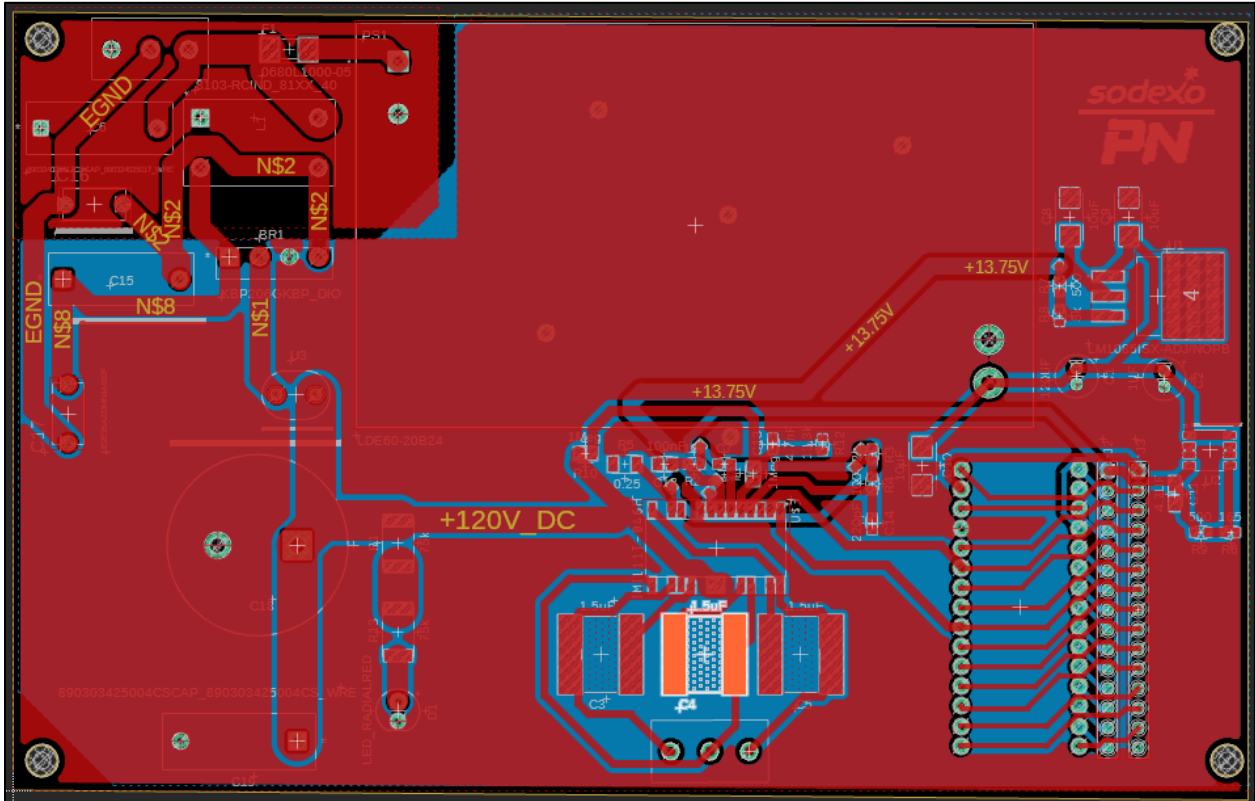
2D PCB of Conveyor Electrical System Gerber File for Manufacturing
